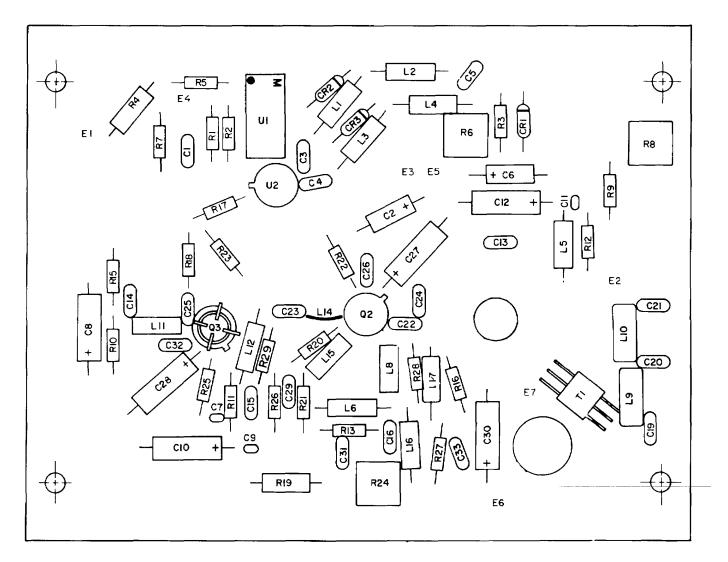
Modulation Eliminator Circuit Card Assembly, 1A5A5A1 Parts Location Diagram
